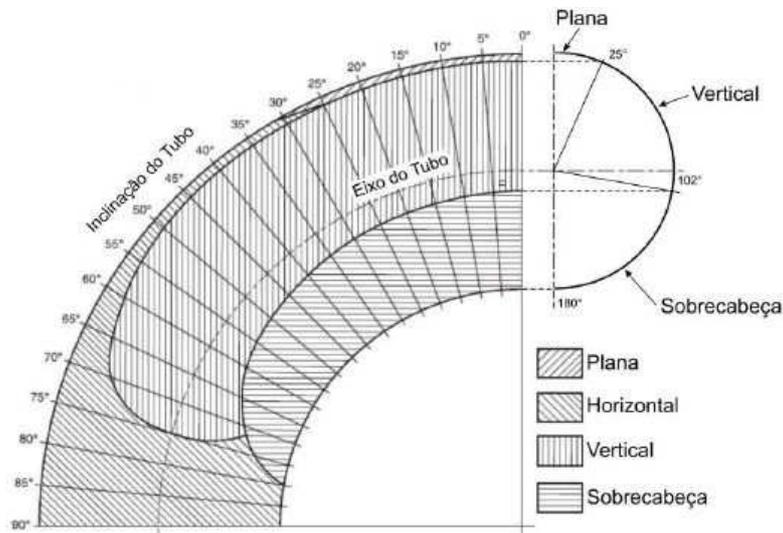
Welding positions equivalence for pipes. Adapted from [8].
